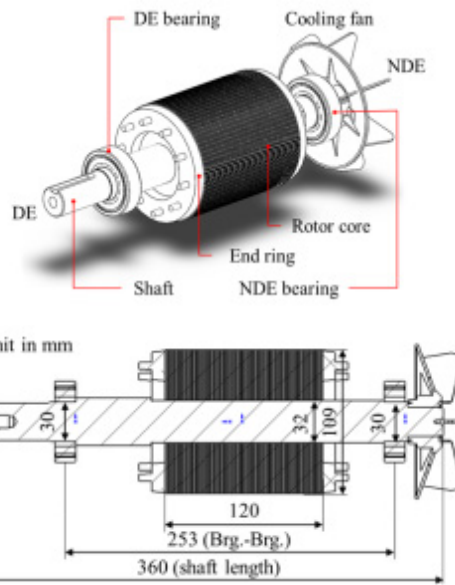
3D and 2D drawings of the rotor-bearing system for the initial design induction motor
